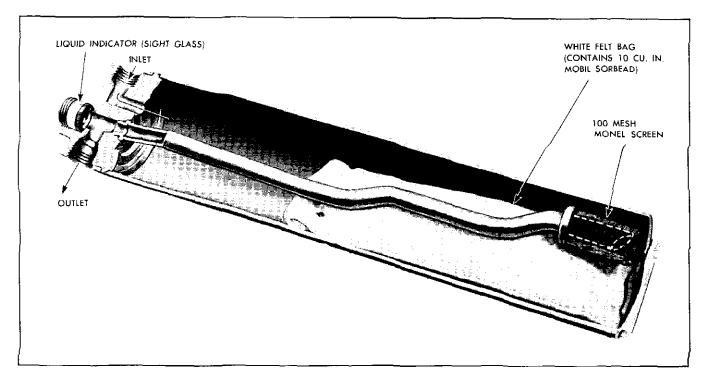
Inside View of Receiver and Liquid Indicator Assembly
